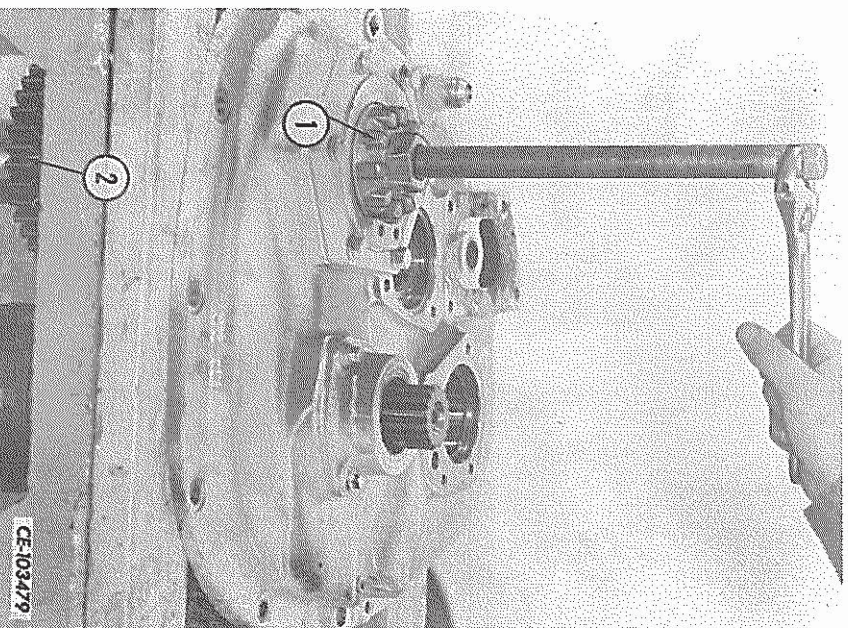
Removing the Bevel Pinion Shaft Assembly
